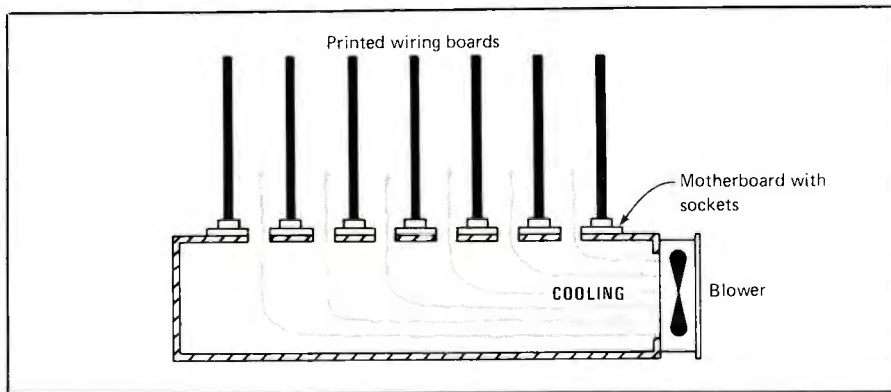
A home-brew chassis to hold a motherboard with a blower fan circulating cool air, up through openings and across components on PWBs.
